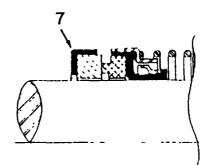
MECHANICAL FACE SEAL ASSEMBLY
